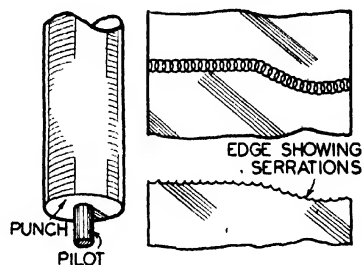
HEAVY-DUTY PUNCH-TYPE NIBBLER TOOL FOR CUTTING PLATES UP TO $\frac{1}{4}$ IN. IN THICKNESS
